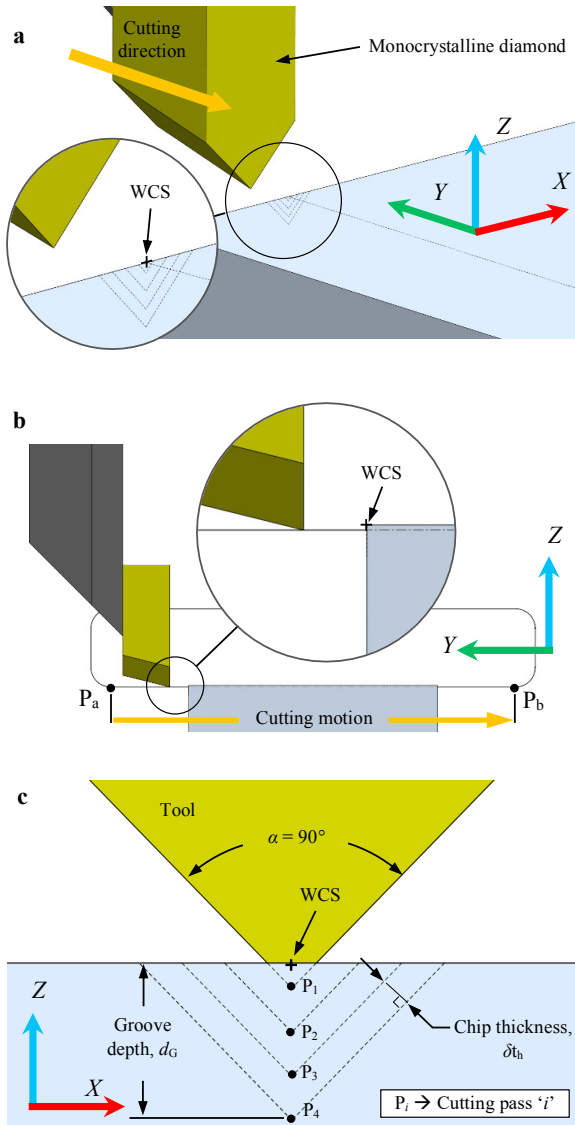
Cutting kinematics: (a) isometric view; (b) side view along +X direction; (c) front view along +Y direction.
